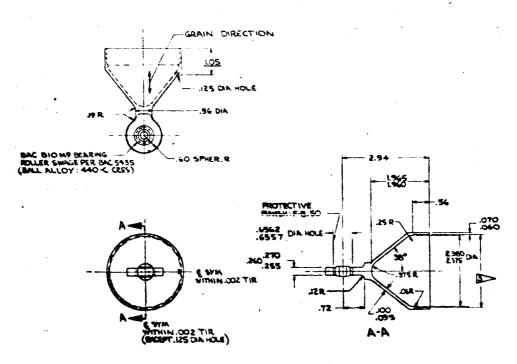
is the design drawing of the compression strut selected for fabrication and test. The part is designed for an ultimate compressive or tensile load of 4000 lbs, and would be expected to fail in compression by buckling or crushing. Spherical bearings have been provided at each end to allow for misalignment of attachment points. The part has been designed to allow a maximum of .05 inches eccentricity between pinned ends, which is believed adequate to account for warpage and tolerance build up caused by the end fittings. It is planned to wet wind the parts with an Epon 826 resin system and 12 end 3-994 glass roving on an aluminum mandrel. The cured part will then be slipped from the mandrel, trimmed and bonded to end fittings with Narmoo 7343 adhesive. Materials for these parts have been ordered and tool design has been started.
